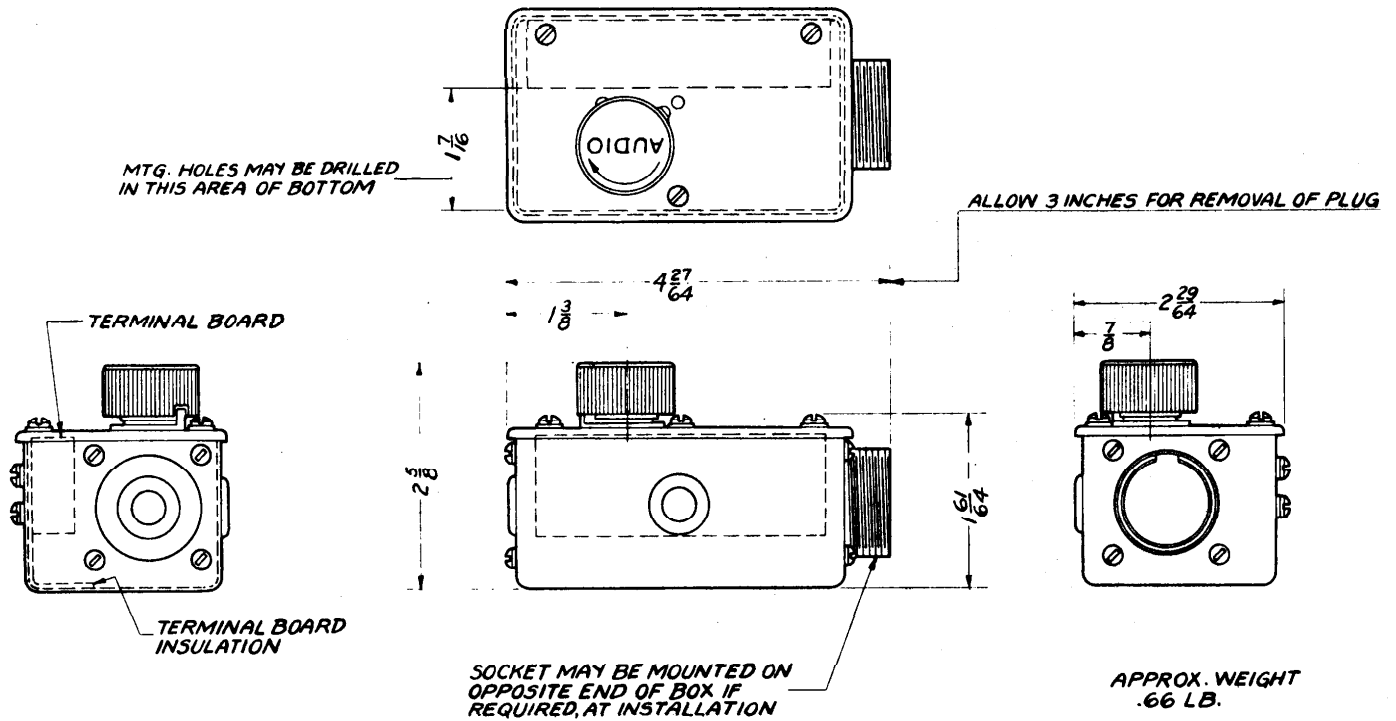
JACK BOX BC-629-B, OUTLINE AND MOUNTING DIMENSIONS
